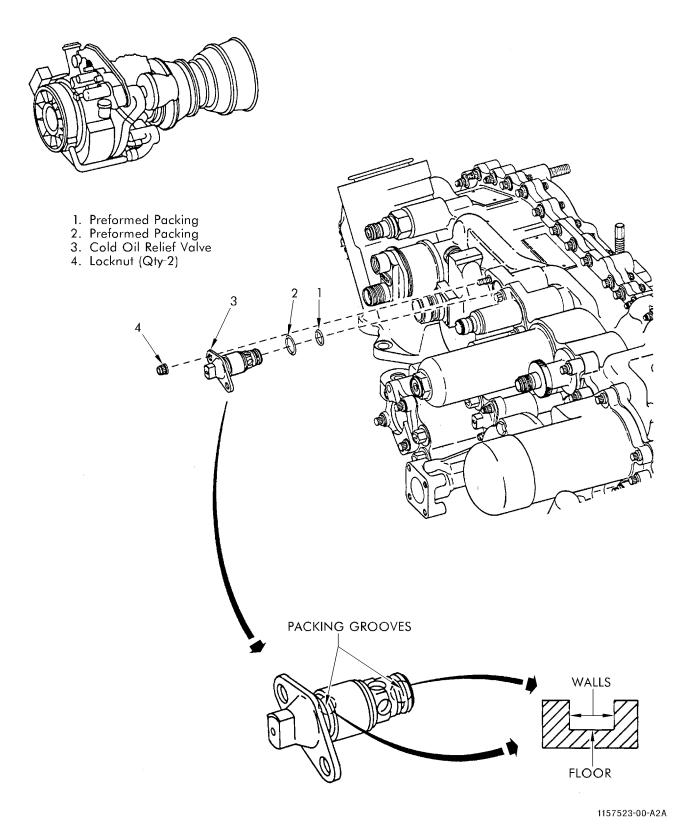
Cold Oil Relief Valve; Removal, Inspection, and Installation
